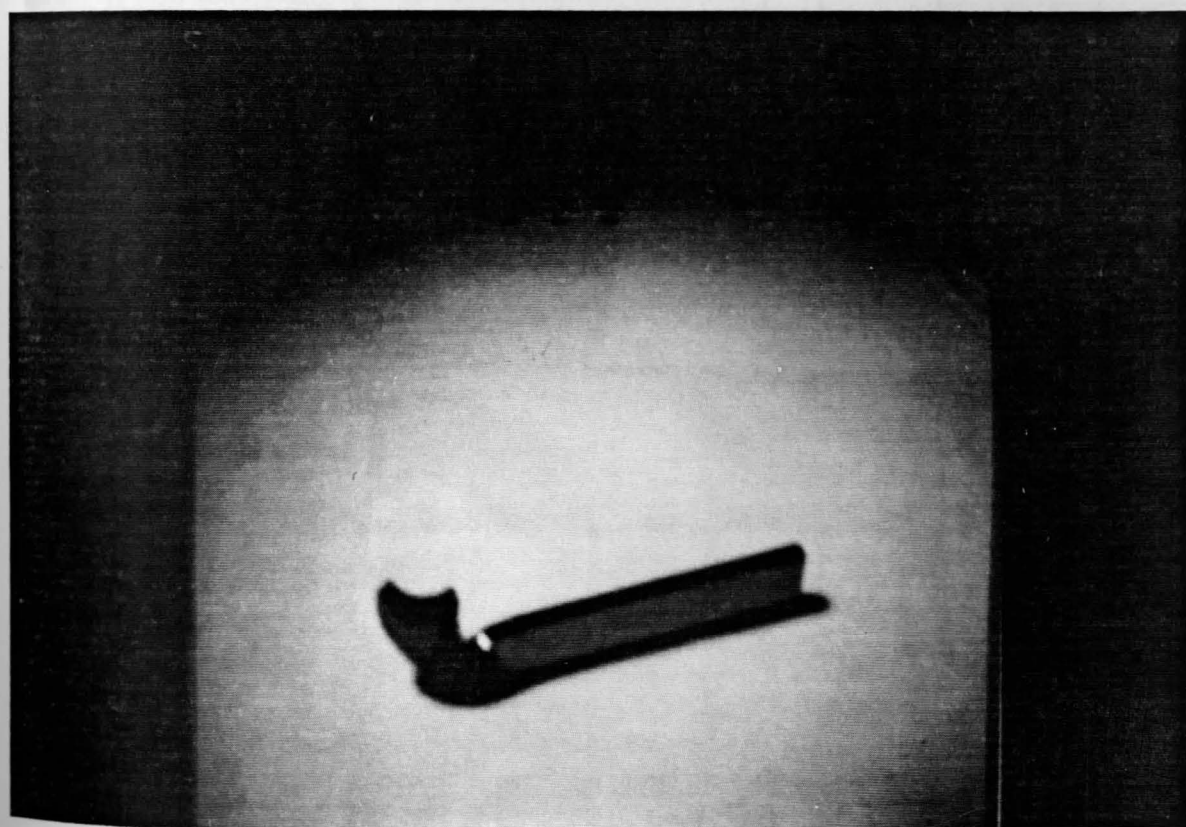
Stereomicroscope photograph of the fracture surface in torsion. Photograph of the sample in torsion.
